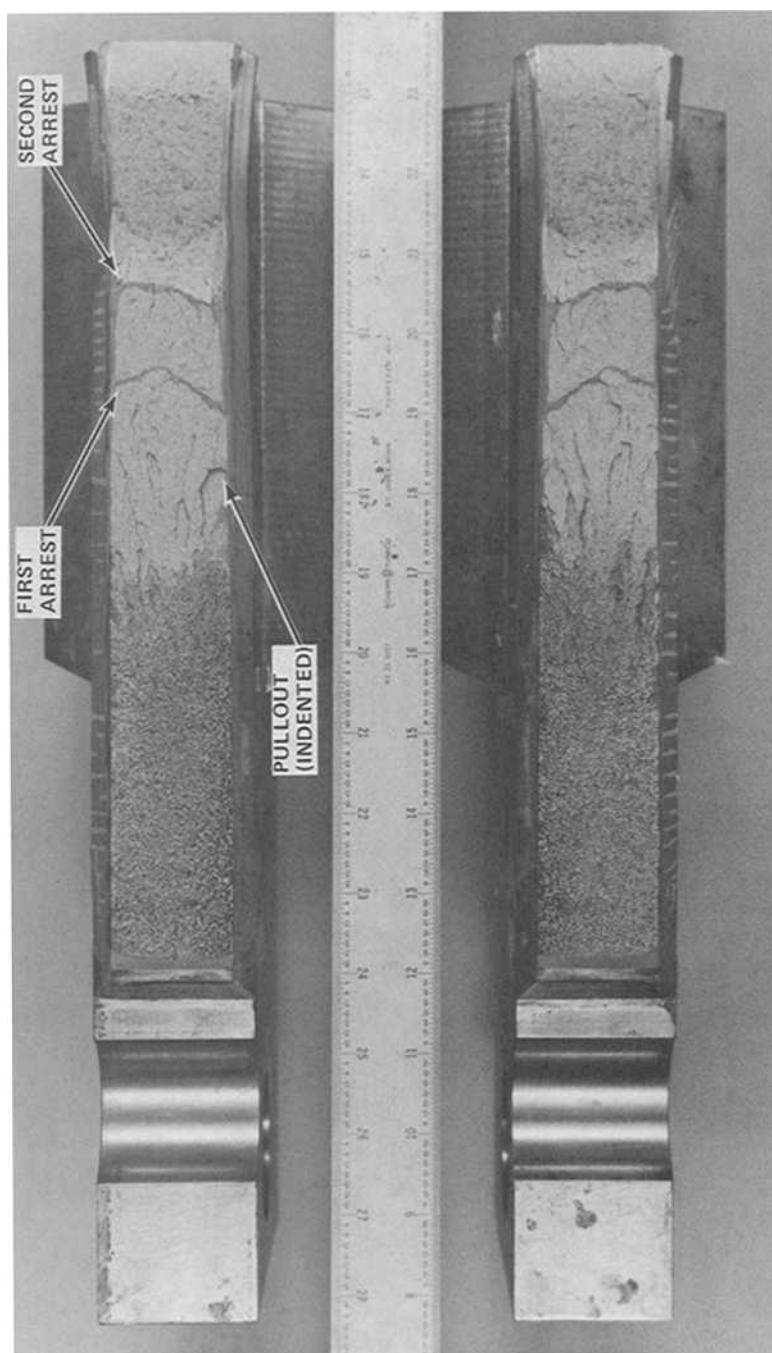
Fracture surfaces in EPRI MMCT Test 9a.
